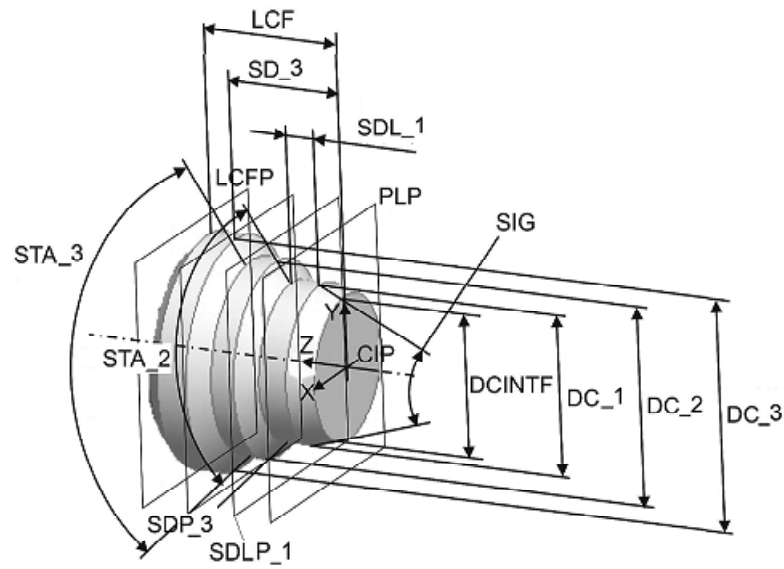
Stepped countersinking tool — Revolved body of cutting part
